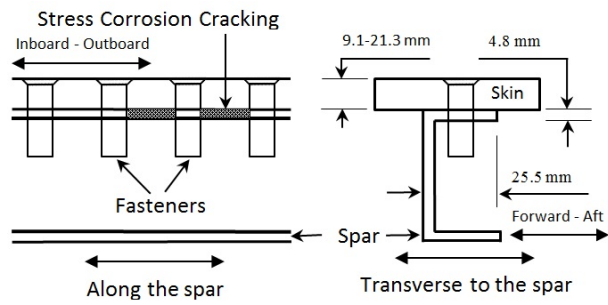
Typical inner wing spar lower cap fastener cross-section and side view.
